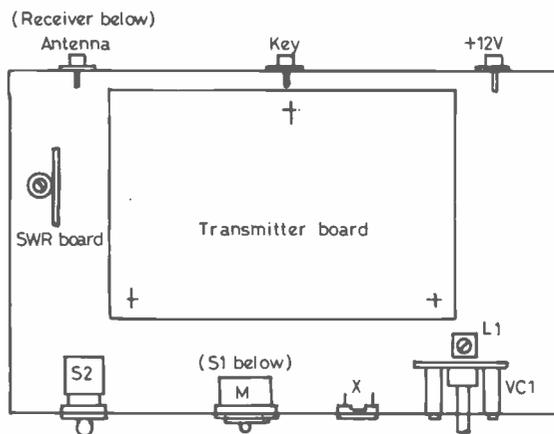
ACME TRANSMITTER - PROTOTYPE MOUNTING
